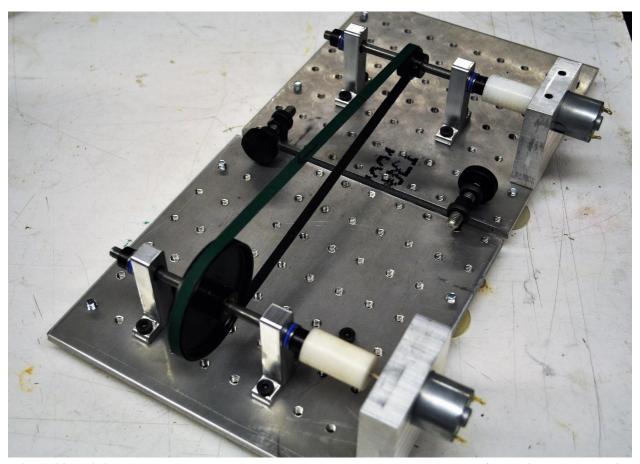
This is the completed belt and pulley assembly. Note that temporary shaft couplings are shown in this picture. Also not the configuration of the motors.
